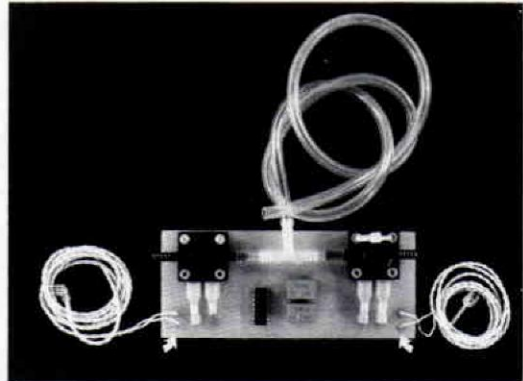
B. Attach Item #8 (battery and orthosis connector wires) to printed circuit board.
